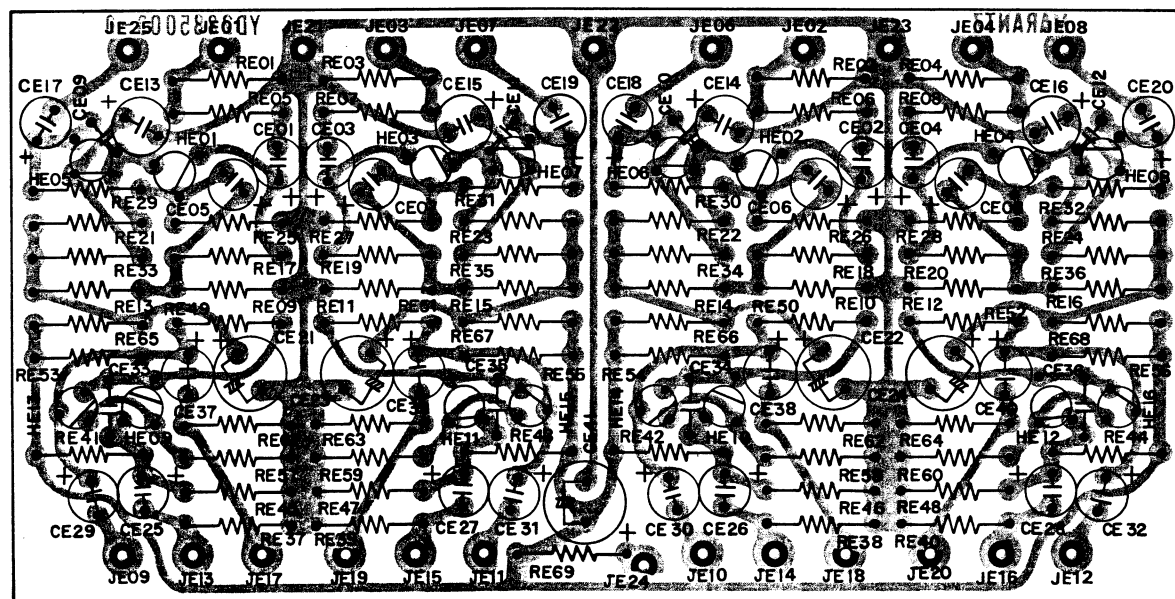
Tone Amplifier Assembly PE01 Component Locations
